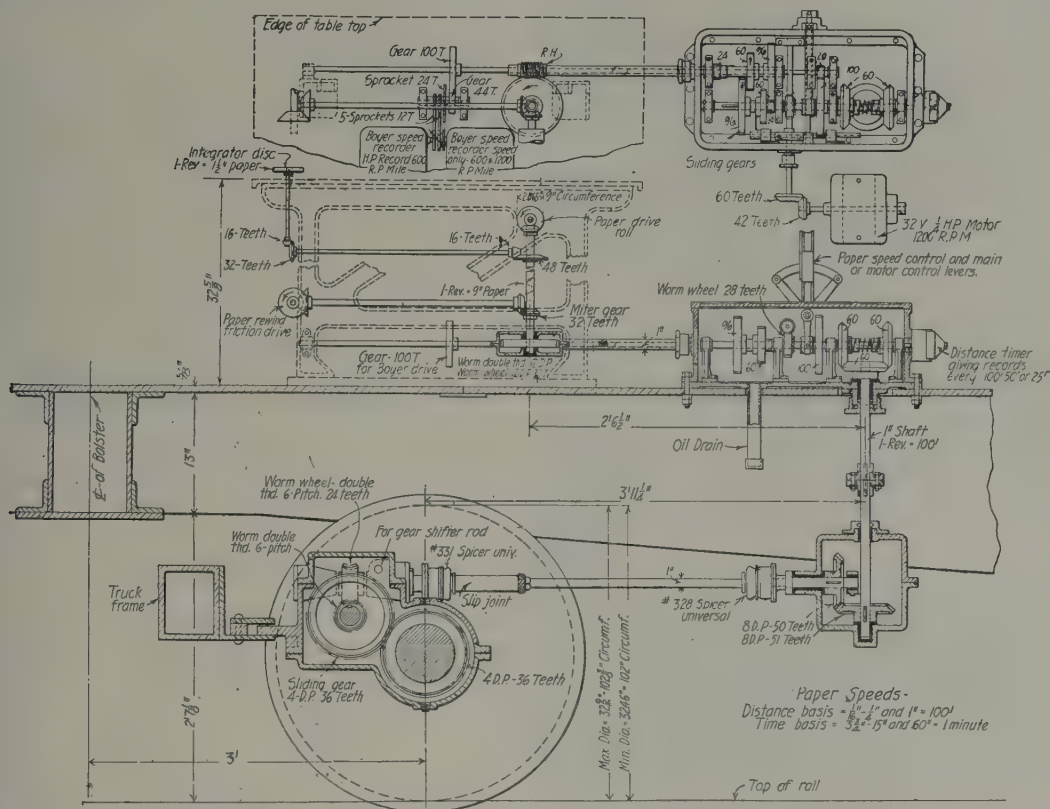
Assembly of Transmission Mechanism for Paper Drive, Dynamometer Car.
